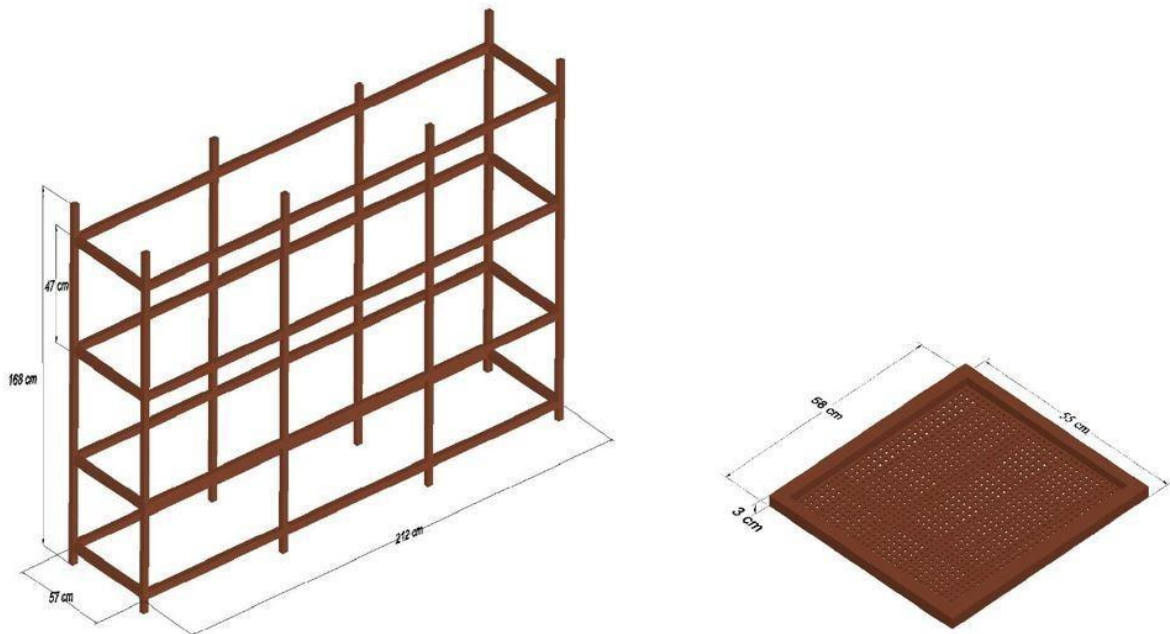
Three-dimensional view of the rack (left) and sieve (right)
